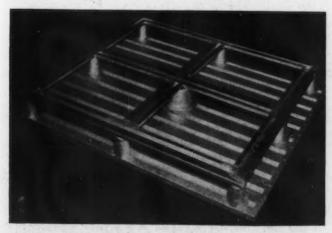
View of underside of pallet showing large bearing area of lower stringers and rigid tubular separators. Corners of upper deck are reinforced with solid aluminum blocks.
